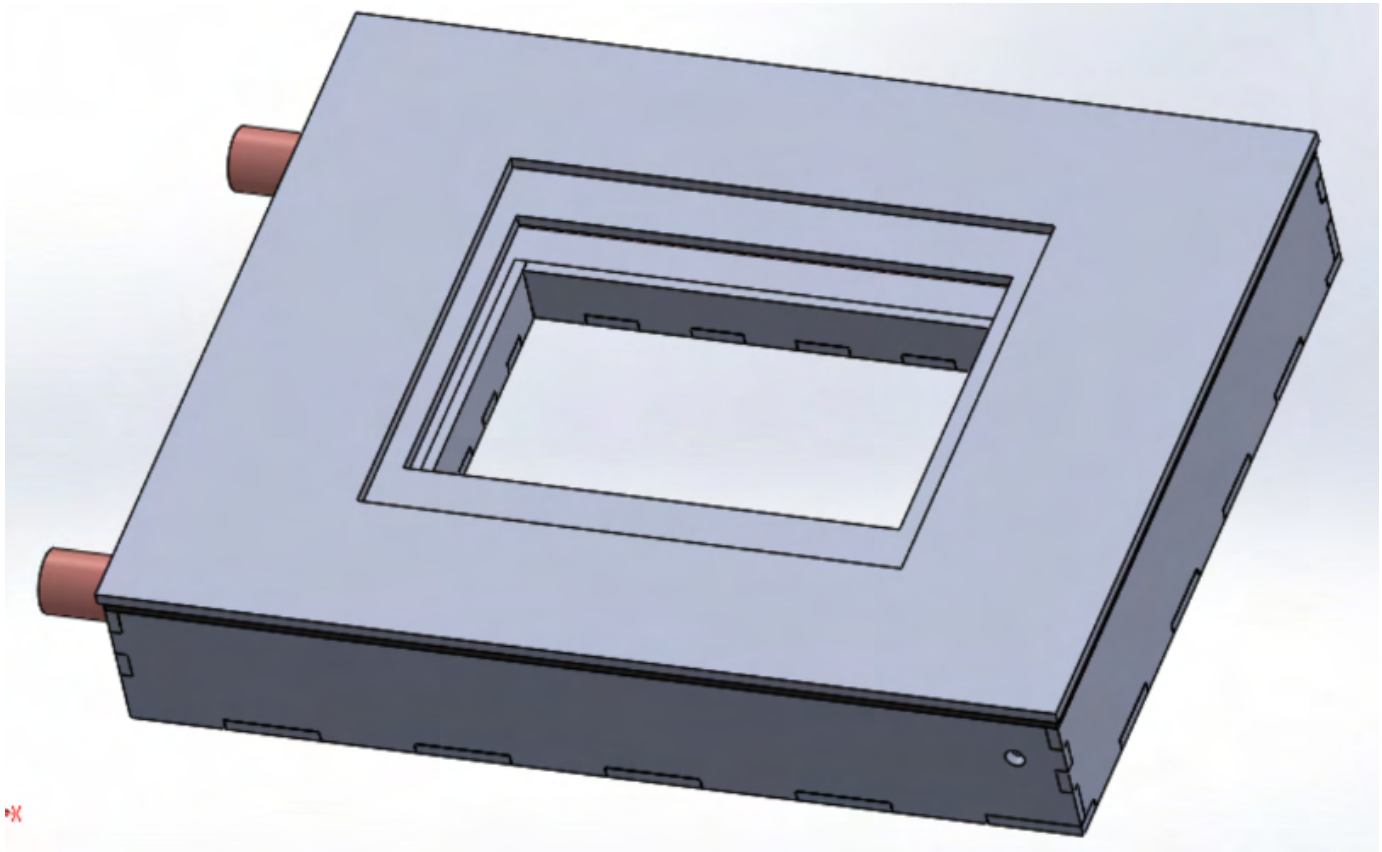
Updated SOLIDWORKS assembly with the lid on top.
